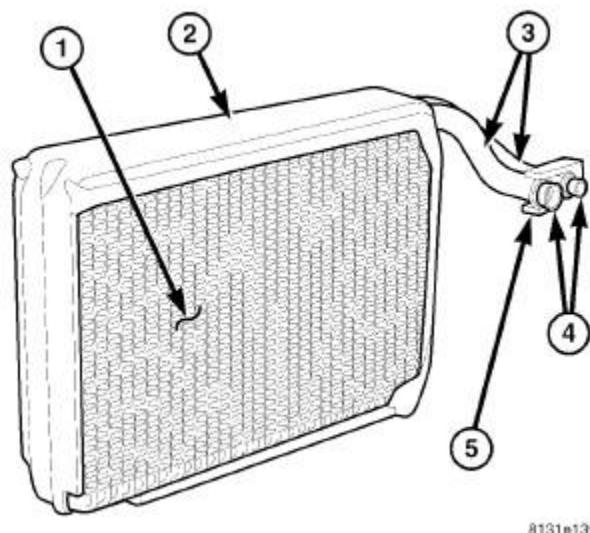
A/C Evaporator, Insulator, Tubes, O-Rings, & Tapping Block
